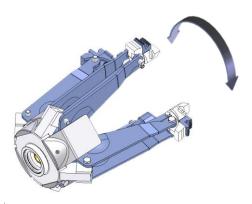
FOUR-JAW UNIVERSAL CHUCK With two rotation speeds in boot directions. Pressure adjustable hydraulic opening and closing.
